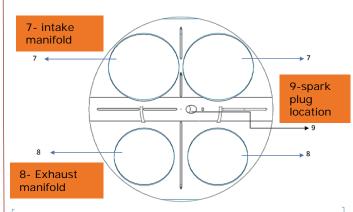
shows a Bottom surface of the cylinder head showing the position of the baffles
